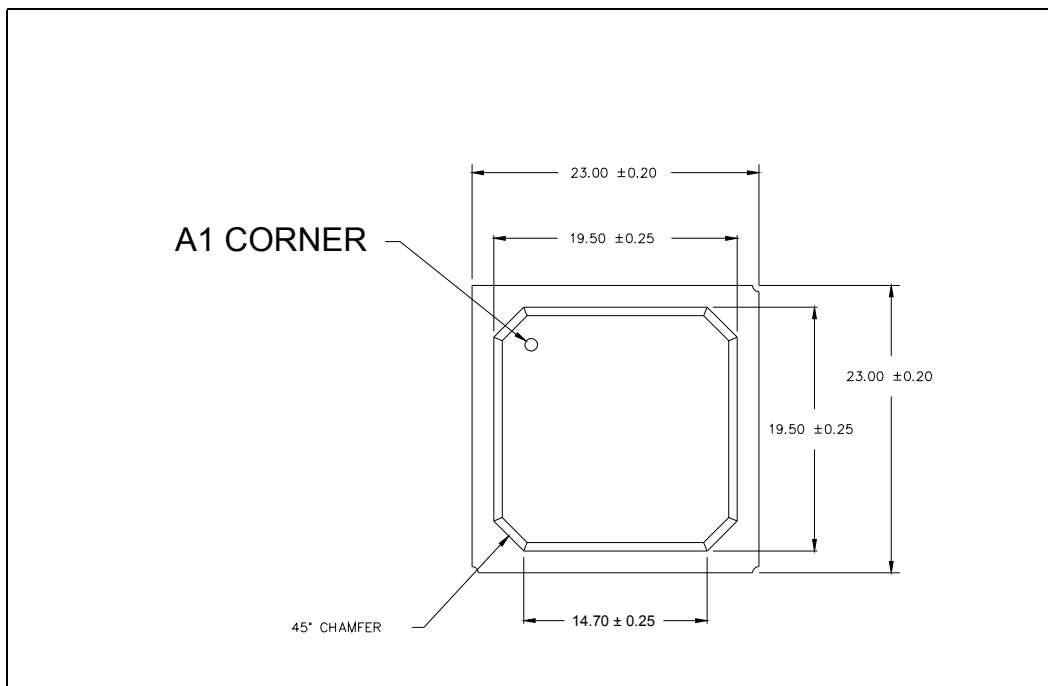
23x23 mm PBGA Intel® PXA270 Processor Package (Bottom View)
